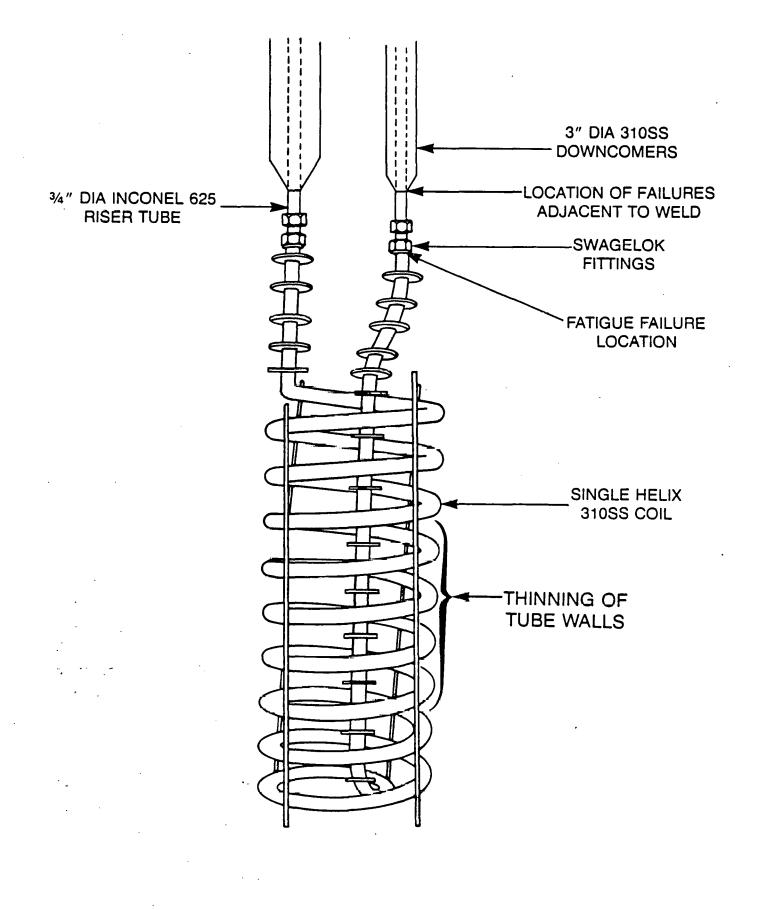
IN-BED Heat Exchanger Coil Assembly
